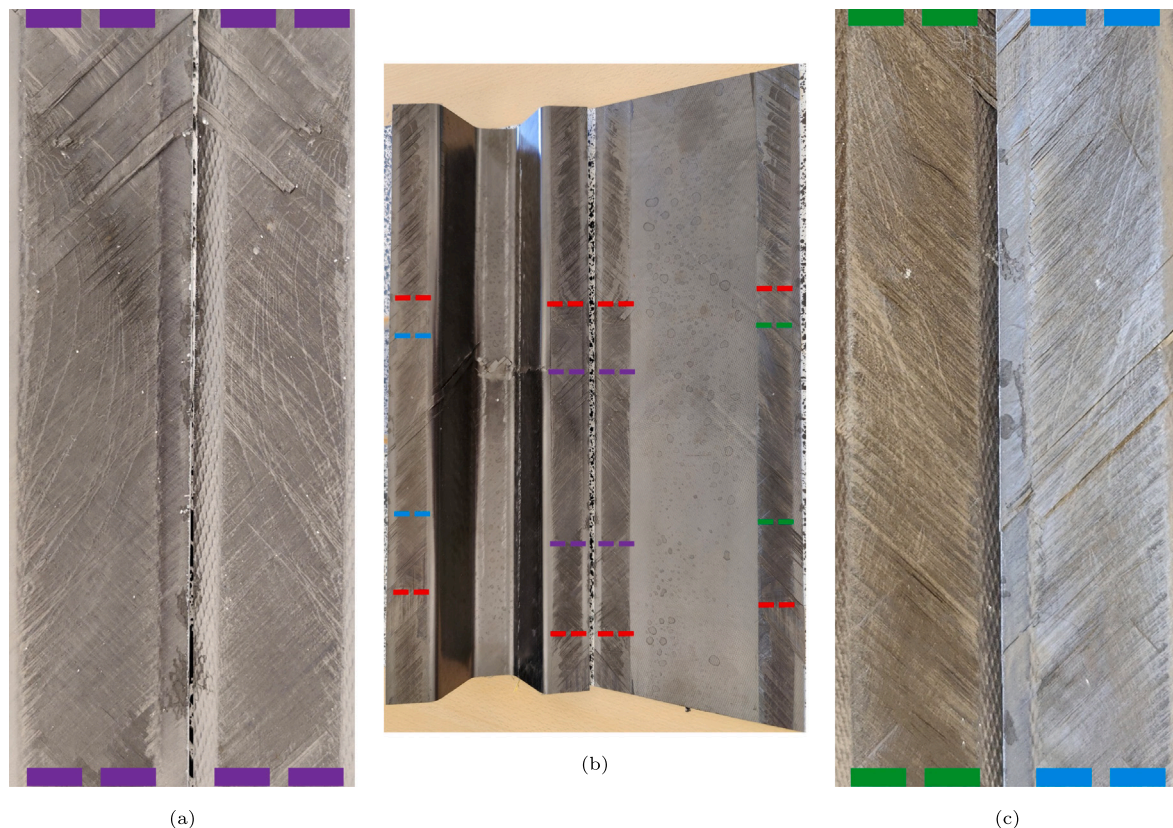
Weld fracture surfaces of panel 1 middle stringer: (a) close-up of the left weld, with the area between purple dashes; (b) welds middle stringer, with the area in between red dashes corresponding to the separated area in the test; (c) close-up of the right weld, with the area between blue and green dashes.
